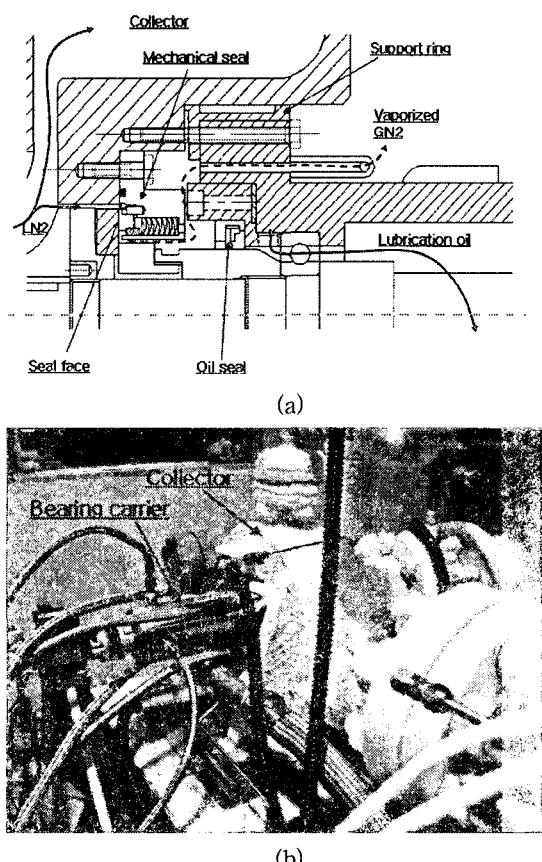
Drawing of lubrication part (a) and picture of frost (b)
